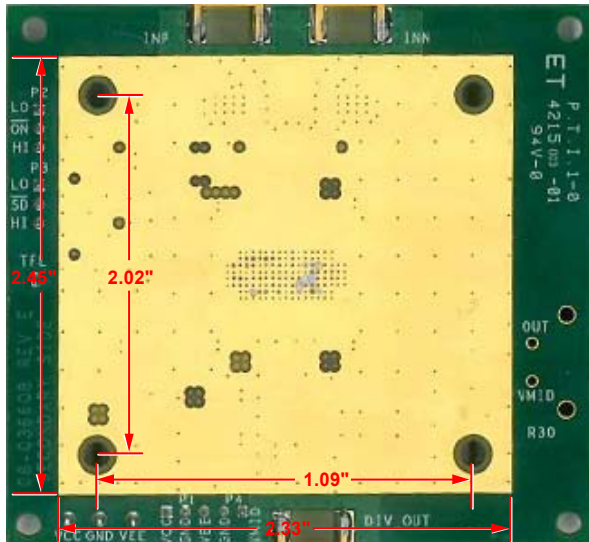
Dimensions of the Heat Sink and Mounting Holes
